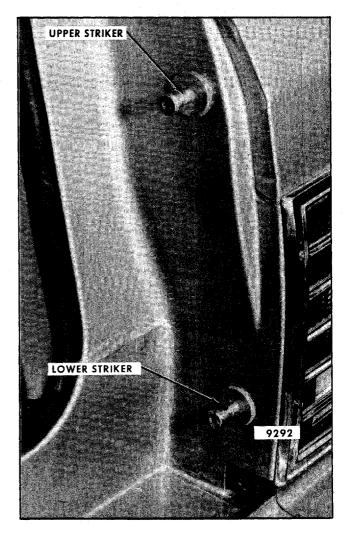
Tailgate Upper and Lower Striker Assemblies
